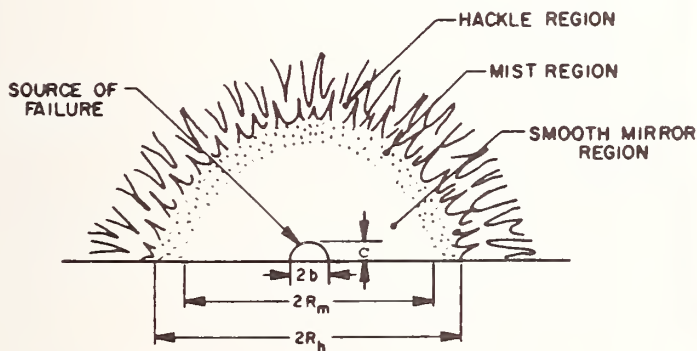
Shape and General Appearance of Fracture Surface
